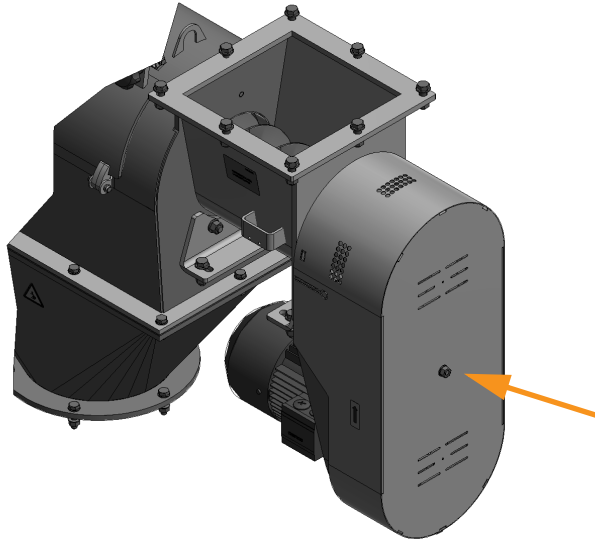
Bearing housing (drive side): Remove bolts on protective plate.
